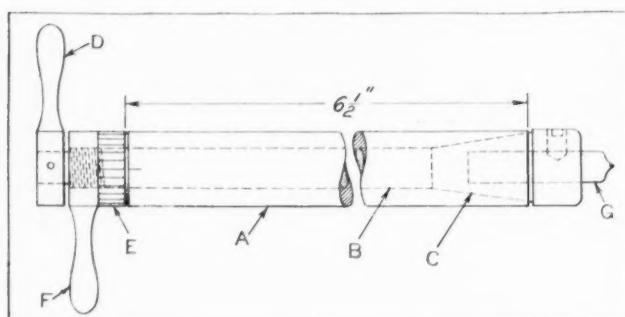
Combination Tool Used for Reaming and Rolling Grooves in Holes Drilled through Disk Shown in Fig. 1
